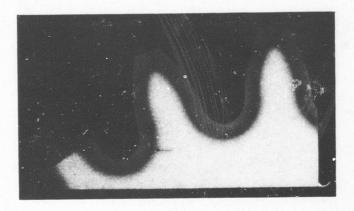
Photograph of Section Through Test Gear Showing Case Depth Around Root Fillet Contour.
